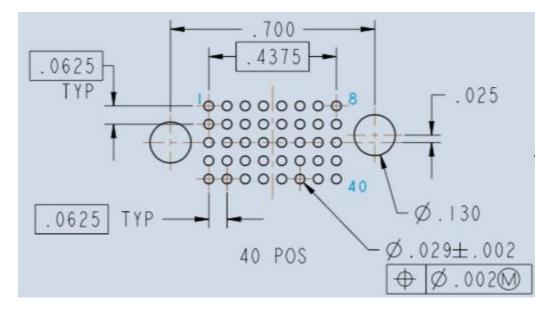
PCB Footprint for the 40 pin HD Stacker Connector.
